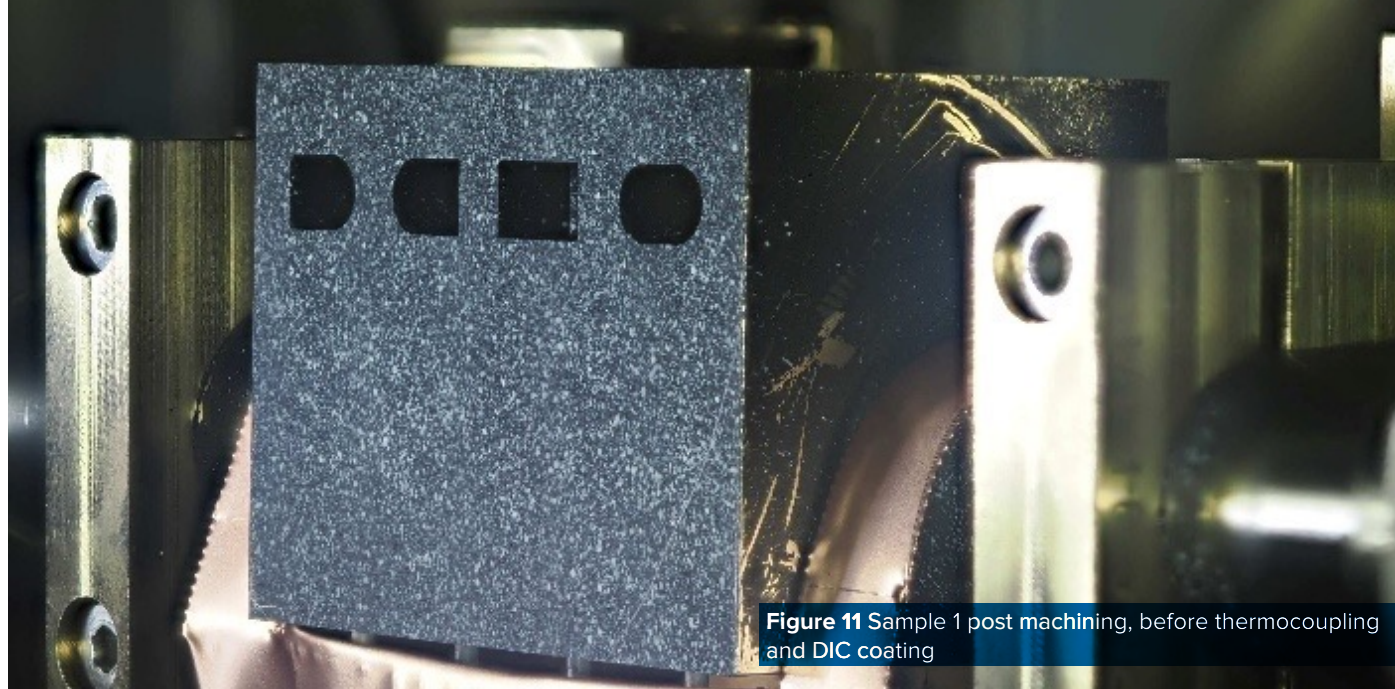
Sample 1 post machining, before thermocoupling and DIC coating
